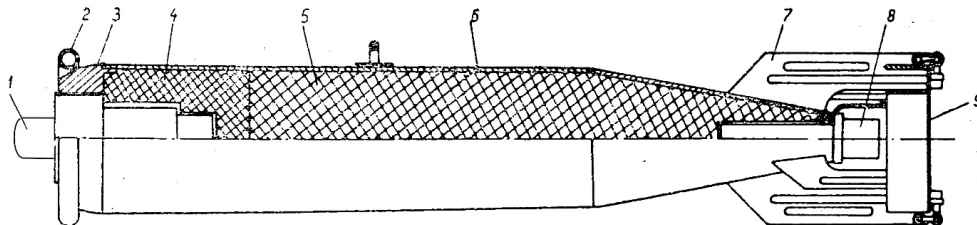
Half-view-half-section of the PLAB-250-120 aerial depth bomb: 1 - front (proximity) detonator, 2 - front braking ring, 3 - warhead, 4 - booster explosive charge (TNT), 5 - main explosive charge (TGAF-5M or MS), 6 - thin-walled body, 7 - stabilizer, 8 - bottom (hydrostatic) detonator, 9 - rear braking ring [1].
